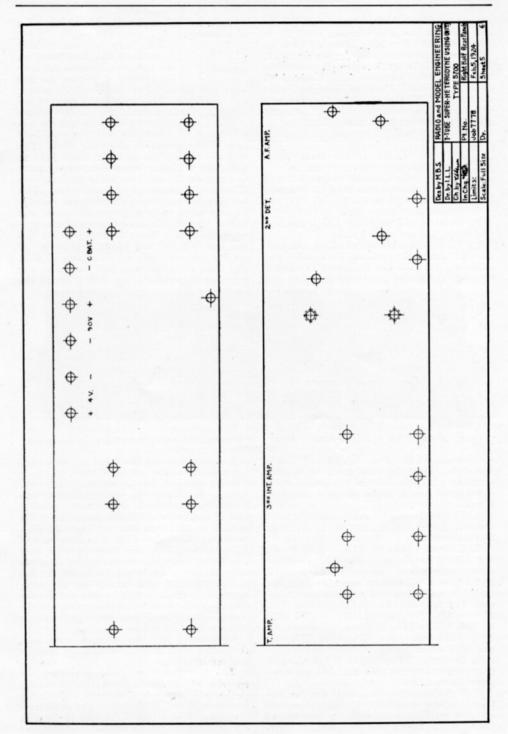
Half-scale drawing of the right hand half of the tube panel and the sub panel.
